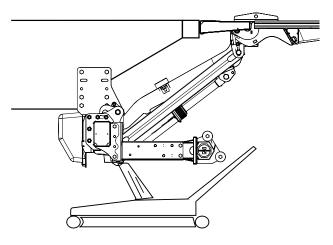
Tighten the bolts and hang the platform onto the floor extension by means of the assembly supports.
